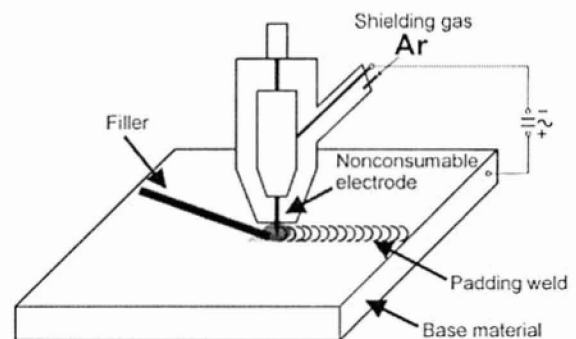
Scheme of TIG surfacing by welding technology
